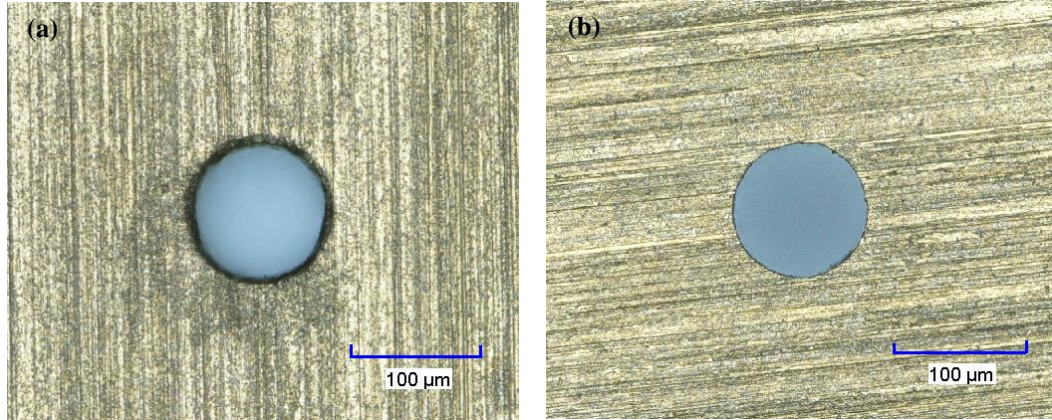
Entrance (a) and exit (b) geometry of helical drilled hole in 1 mm thick stainless steel (1.4301)
